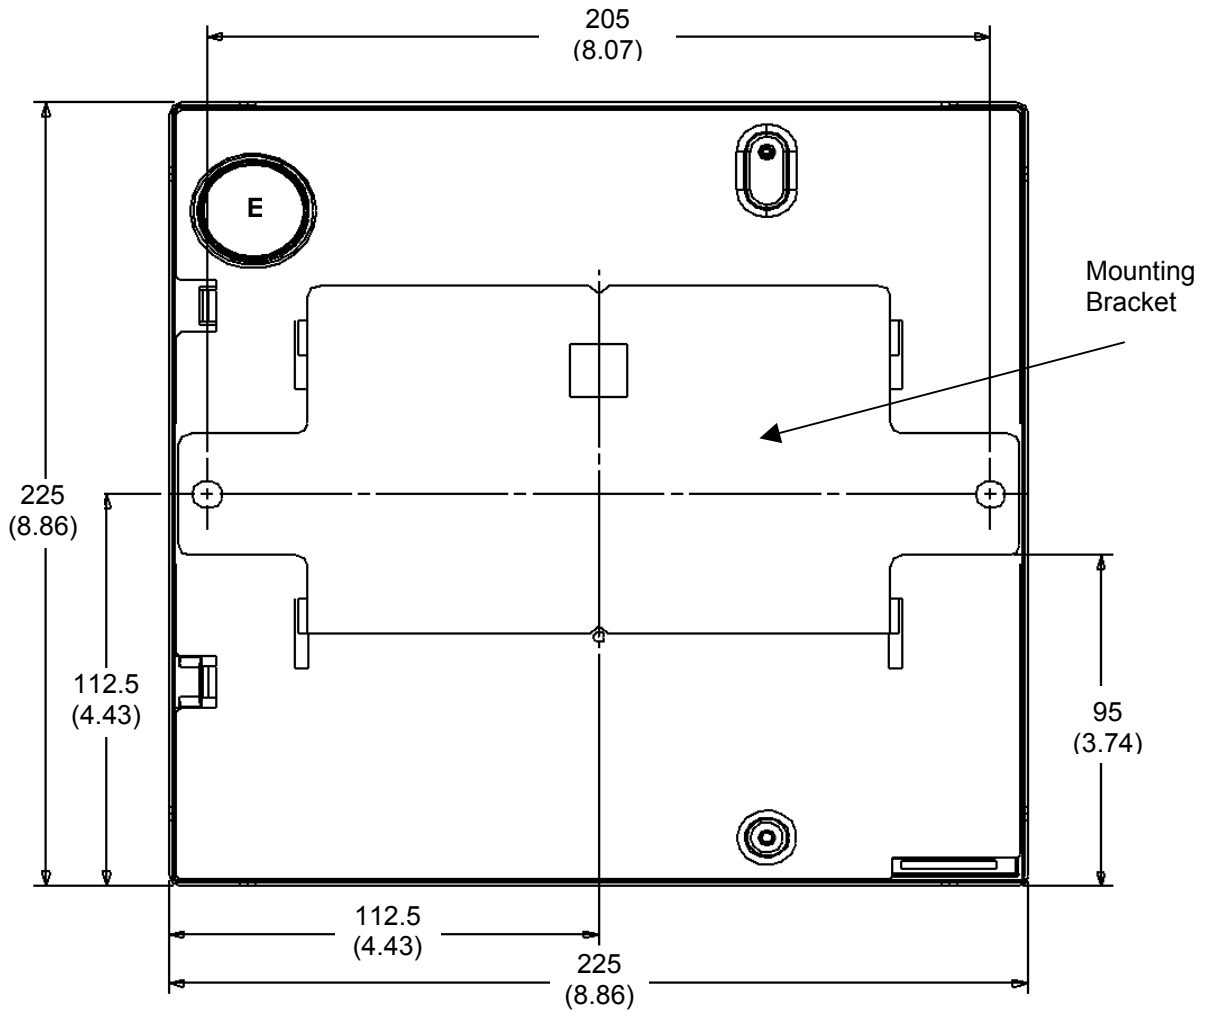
Dimensions in mm (inches) of LaserCOMPACT with mounting Bracket (Rear View)
